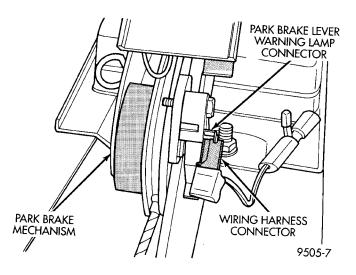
Brake Warning Lamp Connection To Park Brake Lever
